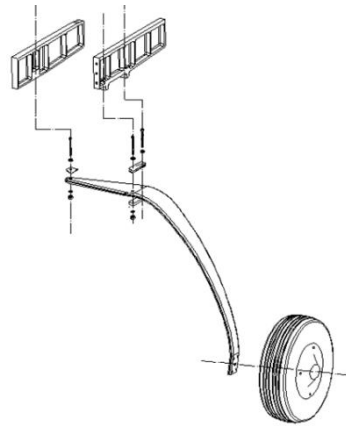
MAIN LANDING GEAR STRUCTURE
